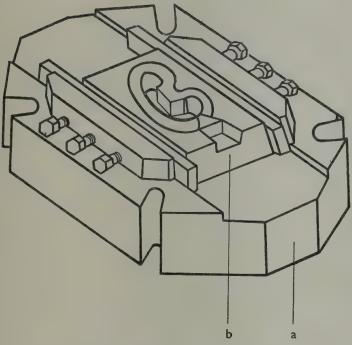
Trimmer tool set with bolster and blade: (a) Bolster; (b) Trimmer blade
